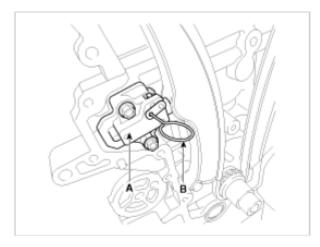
Identifying Hydraulic Tensioner And Pin Courtesy of HYUNDAI MOTOR AMERICA
